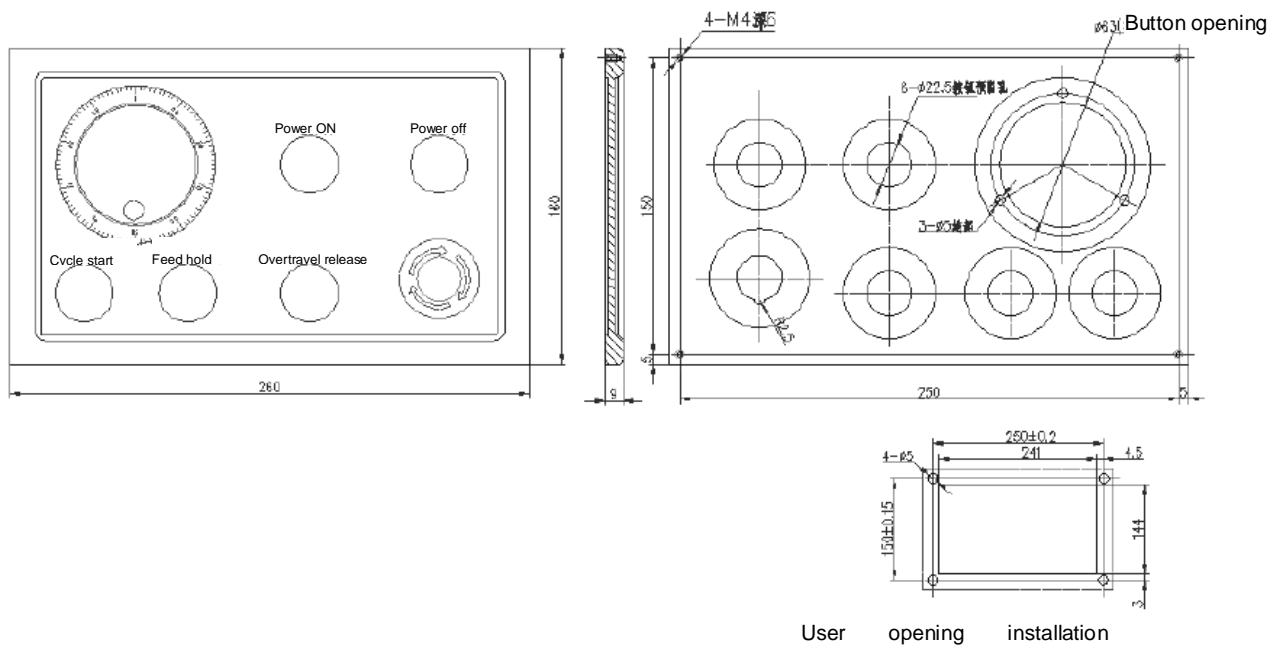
GSK 980TDHi additional panel AP03 and installation dimensions
